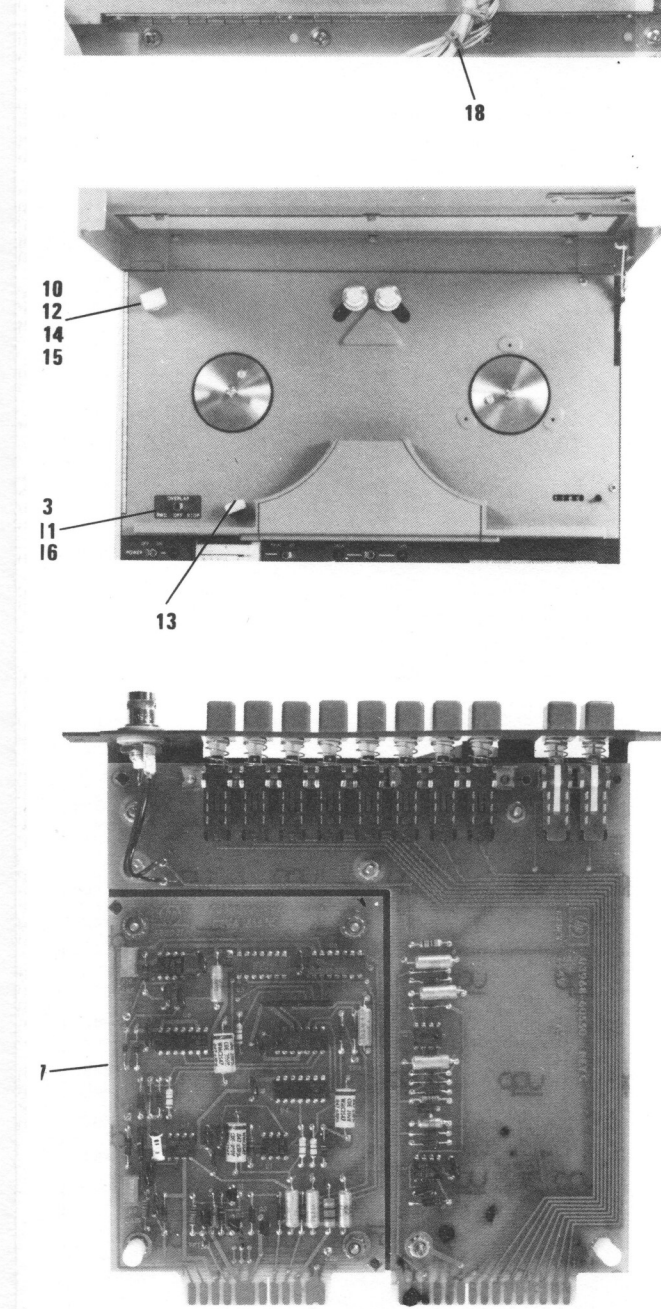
Options 003, 007, 026, 027, 070, Exploded View
